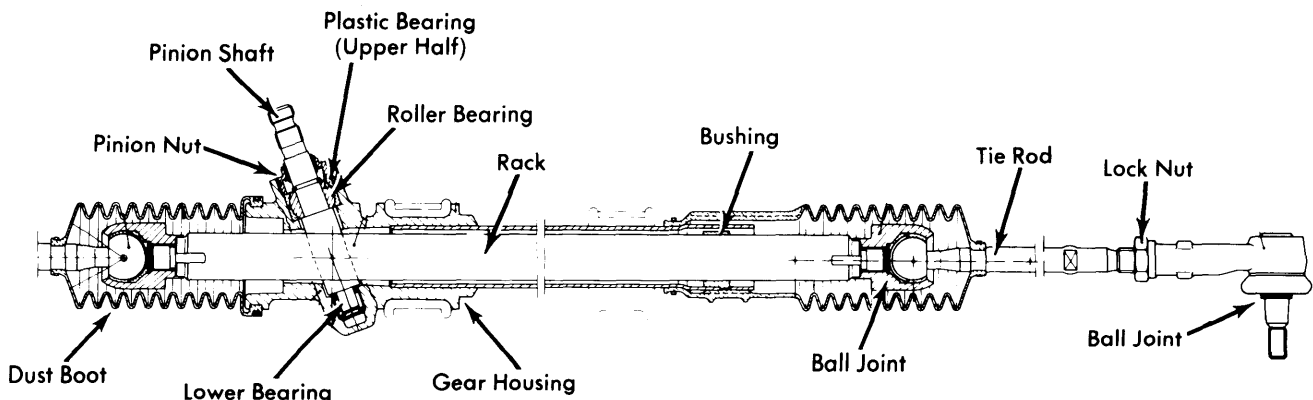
Sectional View of Rack & Pinion Steering Gear Assembly
